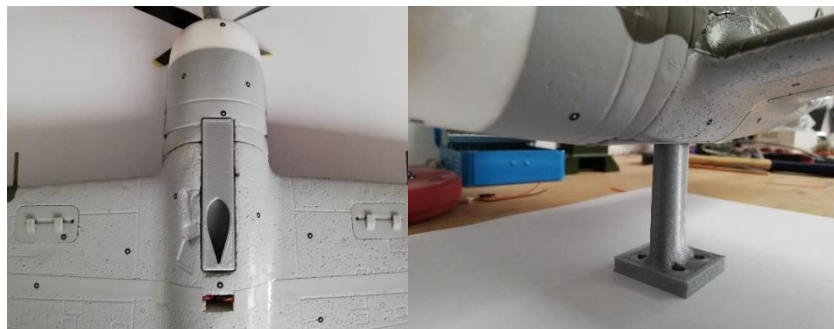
Fitting the fixture's insert in the battery slot (left) and the model mounted to the vertical fixture and base (right).
